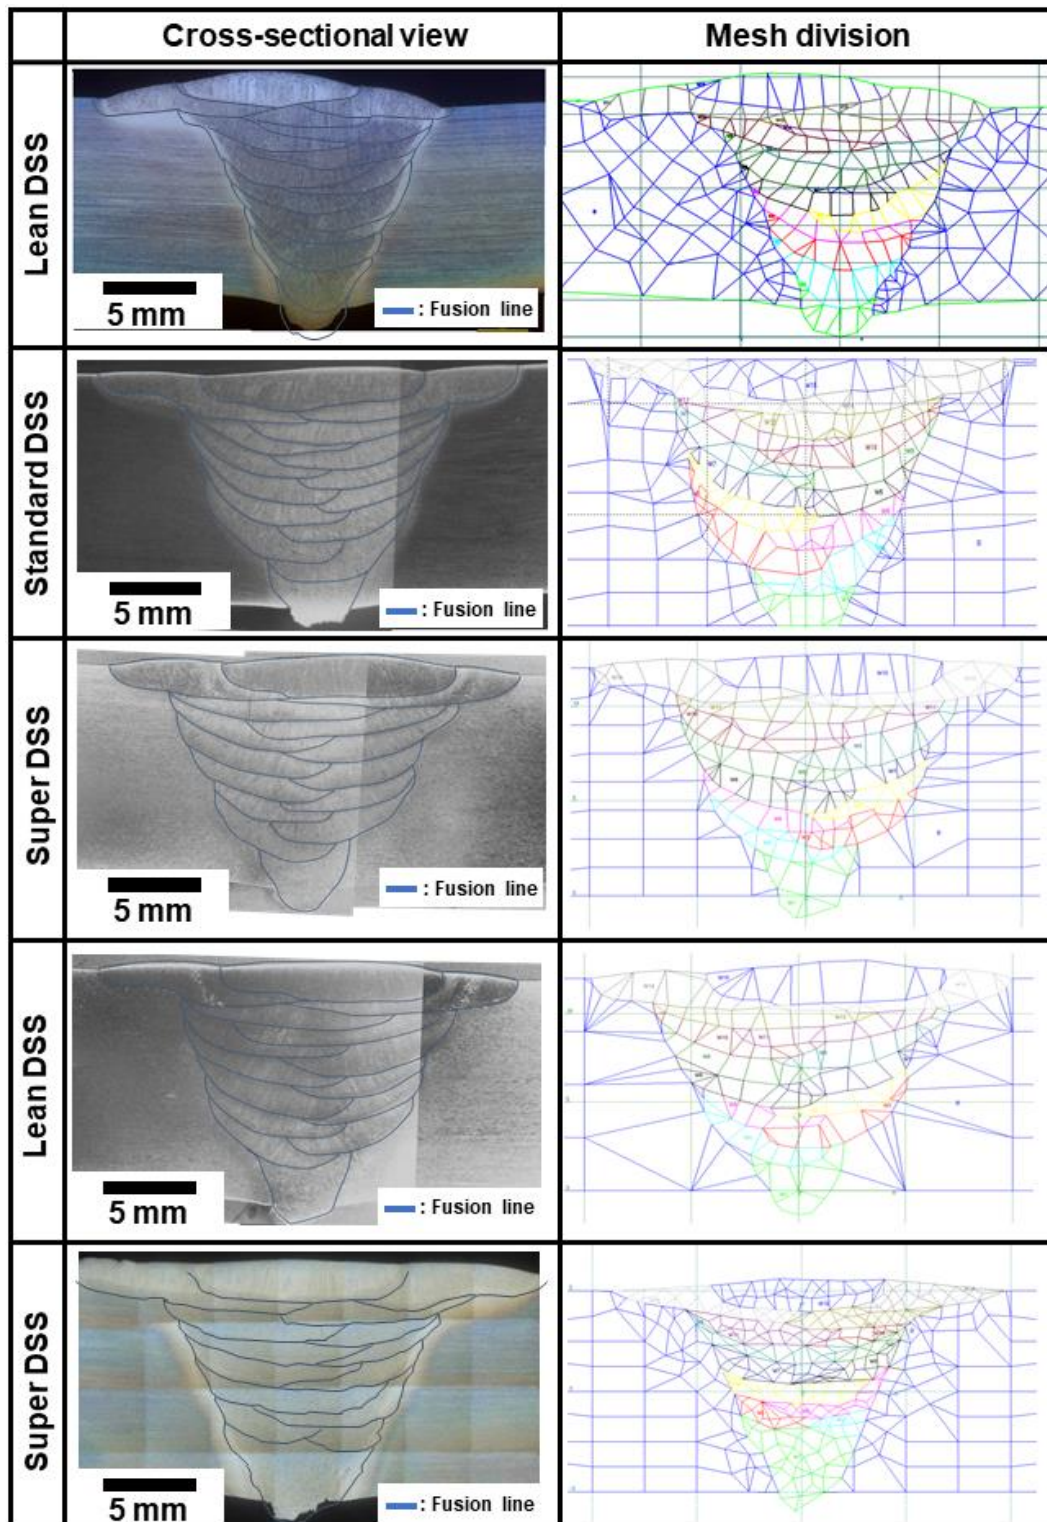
Cross-sectional views and mesh division of multi-pass welds of DSSs.
